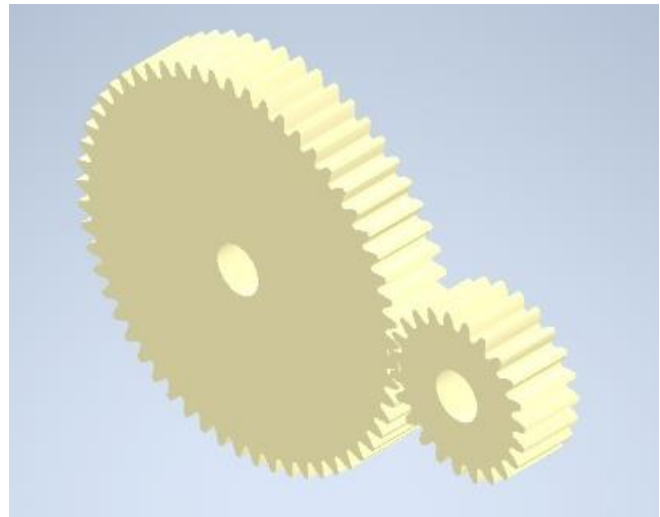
CAD model of the spur gear pair (pinion–wheel)
